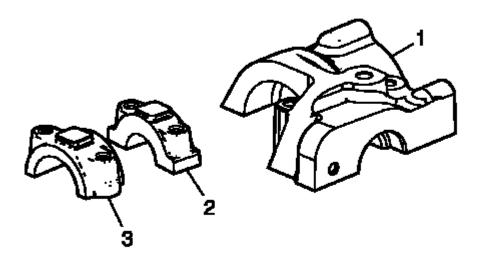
Bearing Caps Courtesy of GENERAL MOTORS COMPANY
